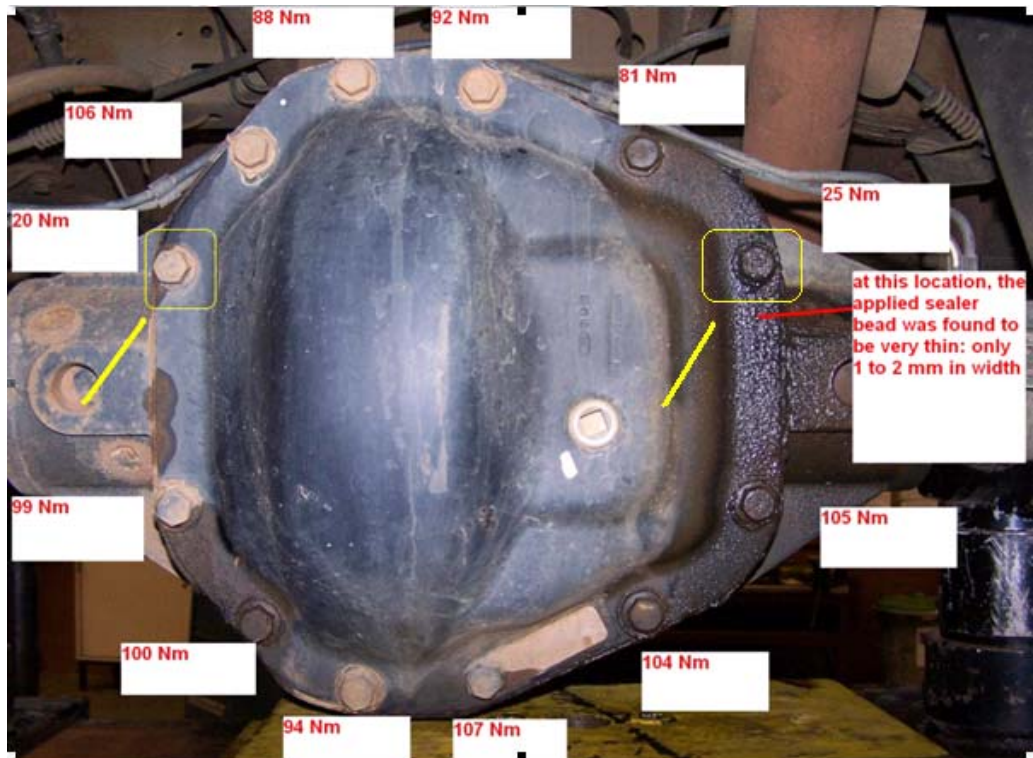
Leakage from rear axle cover 1, after TTGD test (including bolt torques)
